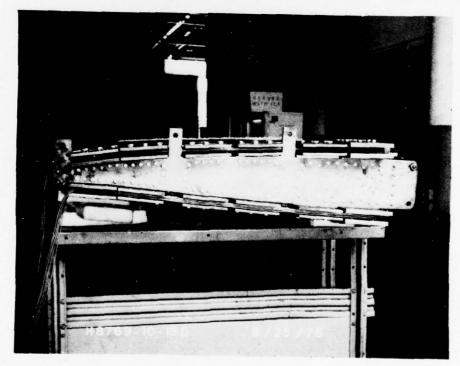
Composite Wing Box Assembly - View of Outboard Loading Fixture
